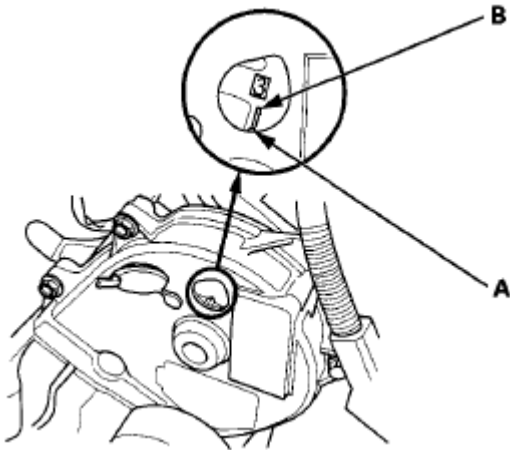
Aligning Pointer On Front Upper Cover With No. 3 Piston TDC Mark On Front Camshaft Pulley
